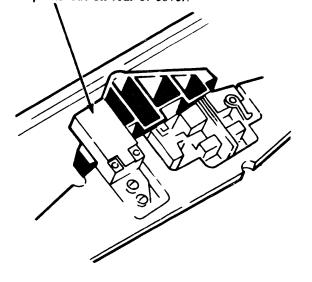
Tape-In-Column Vacuum Switch Assembly Removal and Replacement
